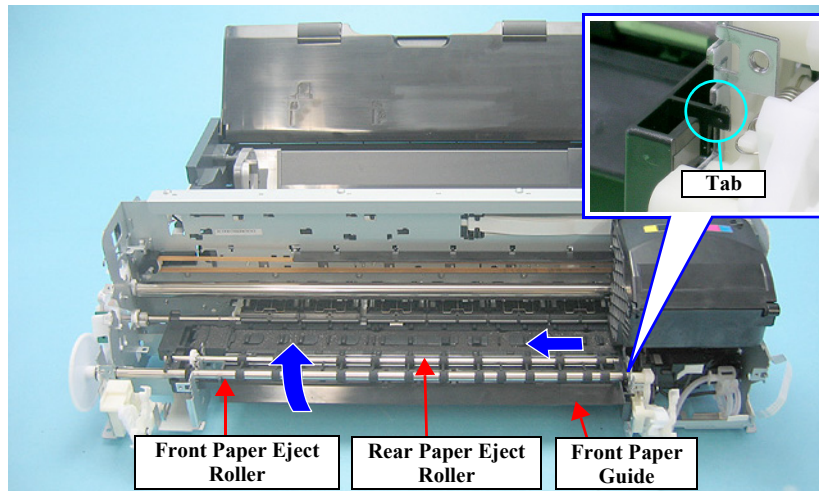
Removing the Front Paper Guide and Paper Eject Rollers
